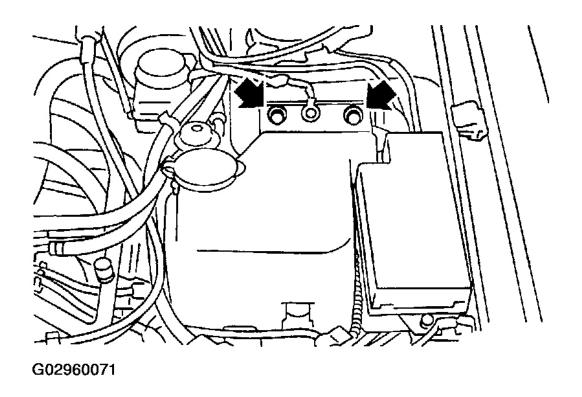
Removing Bolts Holding Washer Tank Courtesy of SUBARU OF AMERICA, INC.
